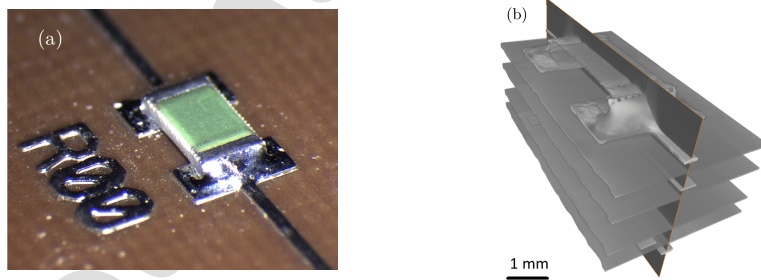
Configuration of an electronic component assembly: (a) surface-mounted resistor soldered on a PCB and (b) micro-computed tomography of the assembly. The vertical dark grey plane corresponds to the micro-section cutting plane.
